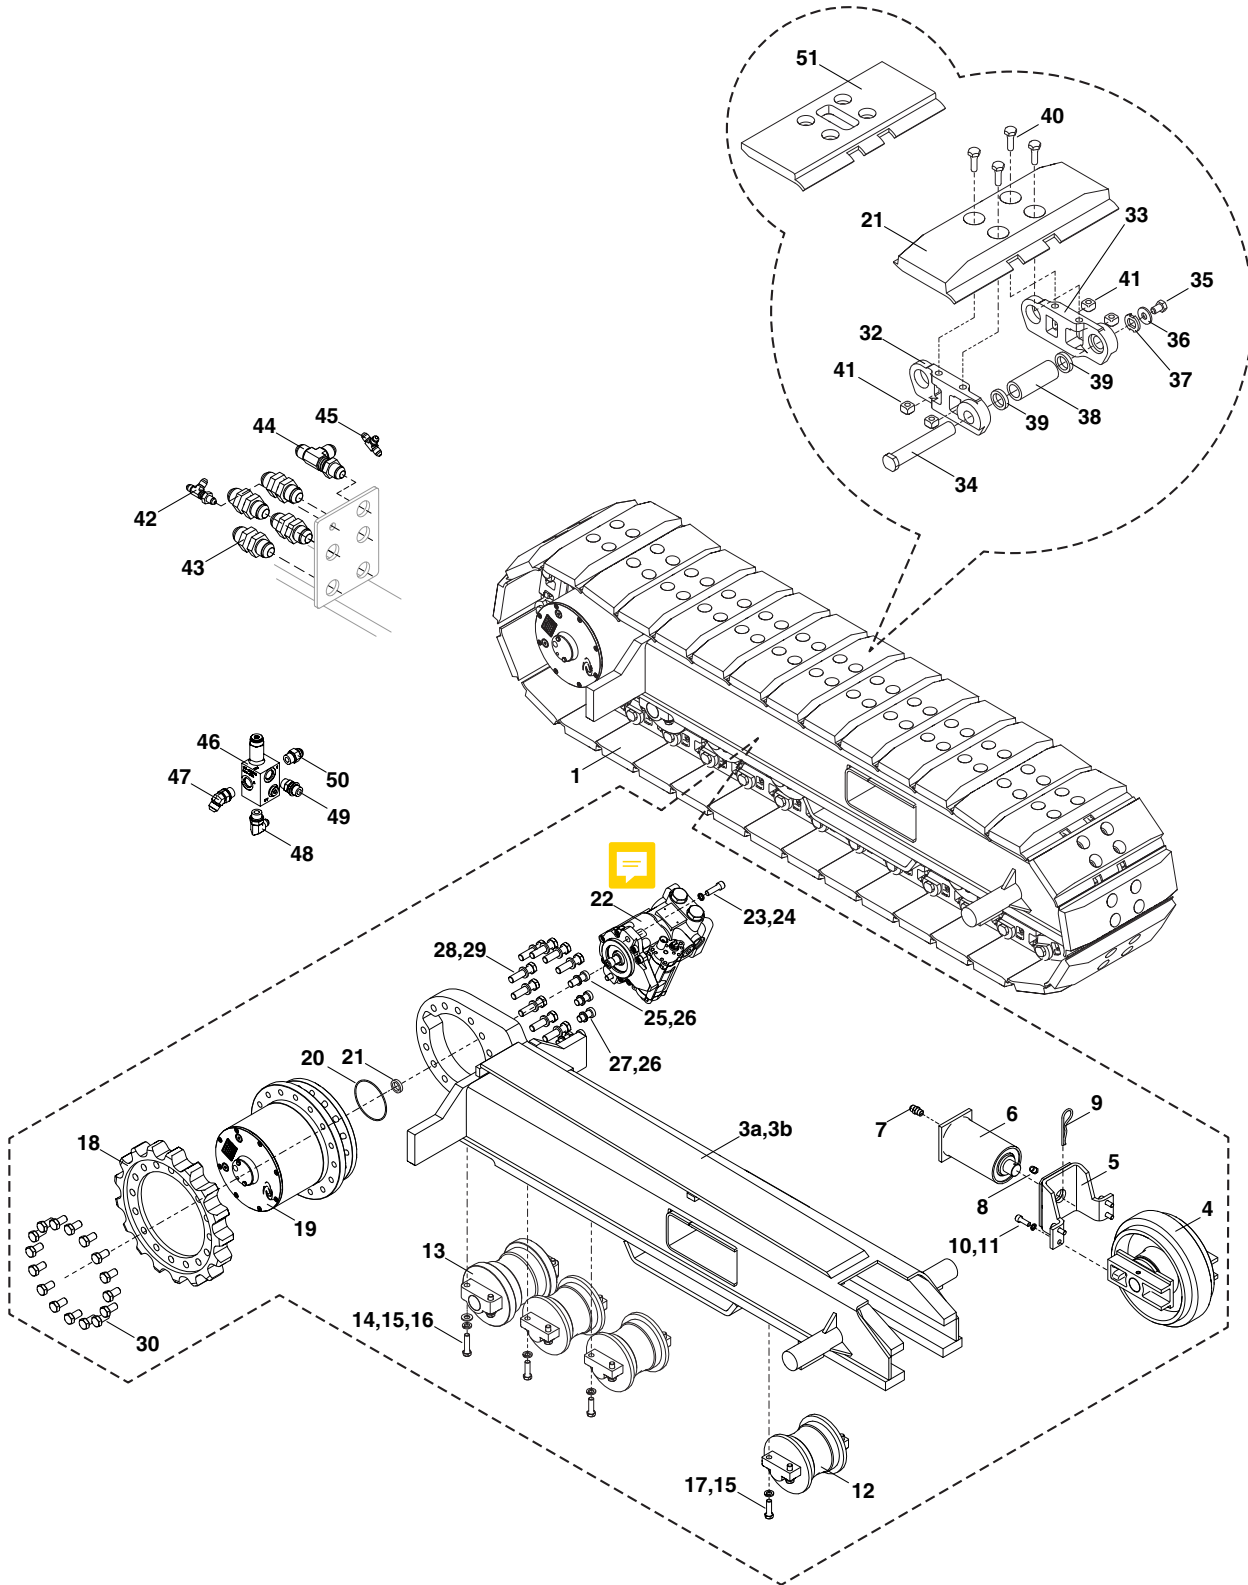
Track Assembly - Poly Pads/Cast Steel (2 of 2)
